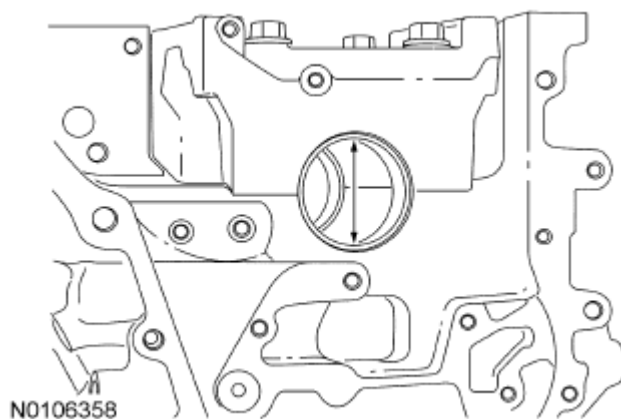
Measuring Crankshaft Block Main Bearing Bore Diameter
